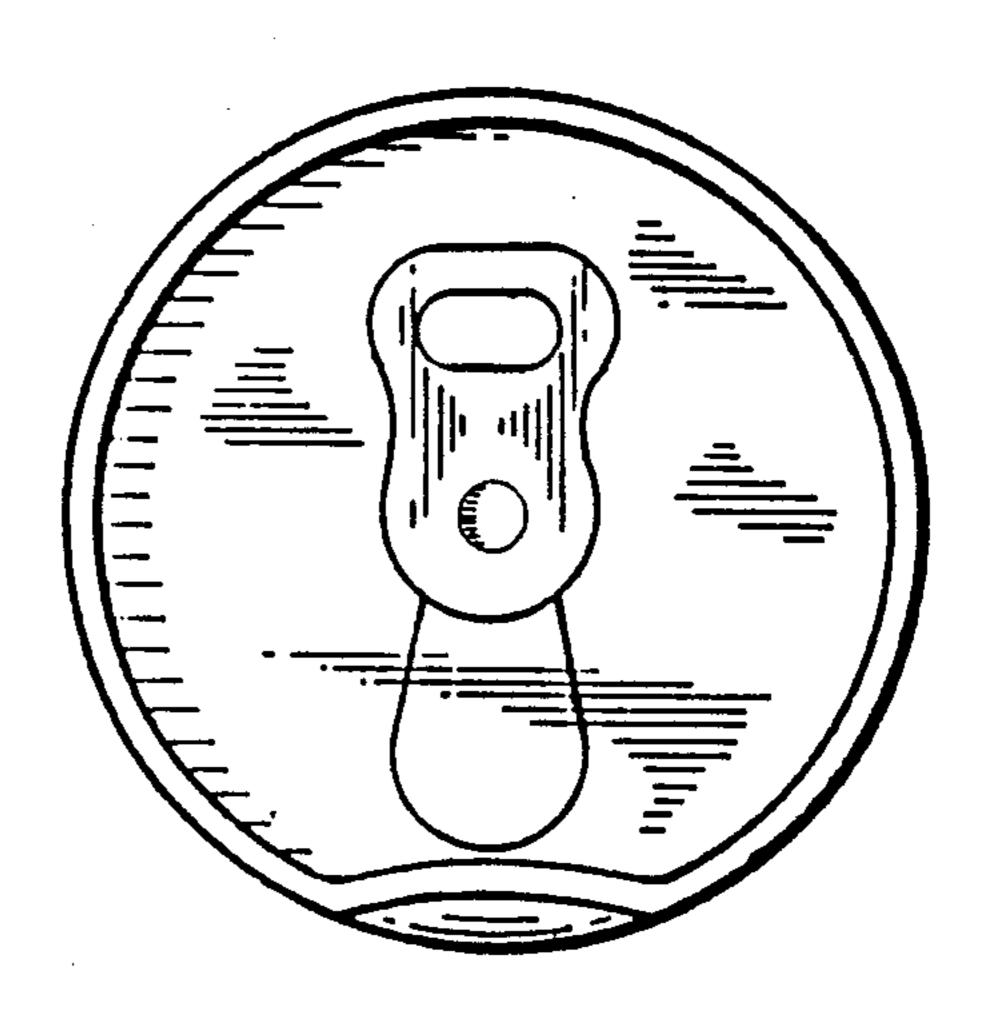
is a bottom plan view of the design shown in FIGS. 7 through 9;
